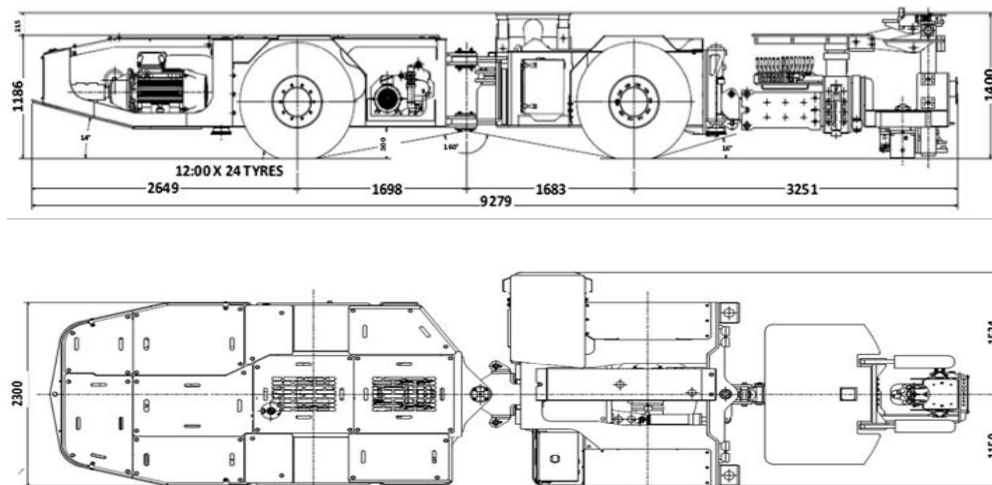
Unmodified 3108 ADE bolter and its technical drawings
